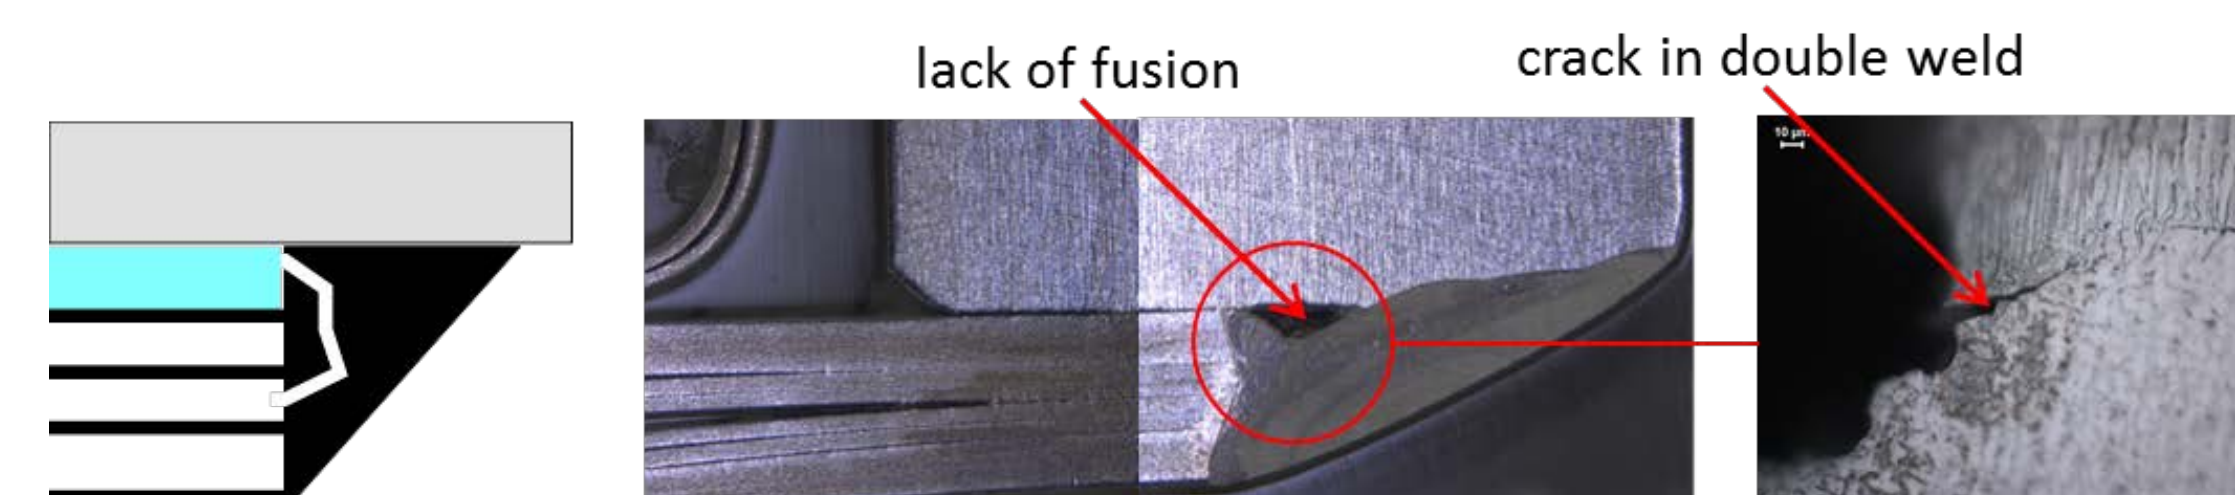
Crack in double weld allowing helium passing in between the plies.
